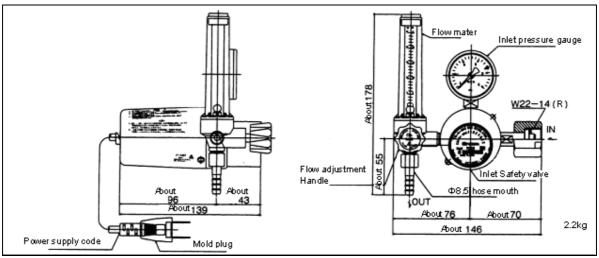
(b) Regulator external dimensions (A05B-1291-J101)
